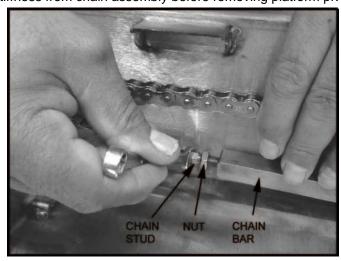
RELEASE TENSION ON CHAIN ASSEMBLY (LH SIDE SHOWN)
